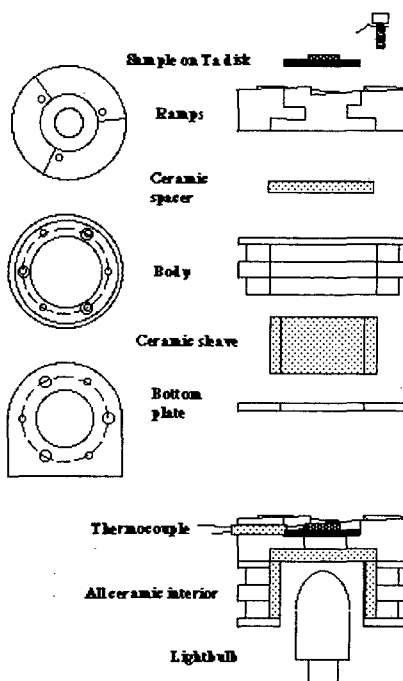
Sample mounting scheme. The sample is held to a 0.010" thick Ta plate by spot welding thin Ta straps over its edges. This assembly is held on the Mo walking ramps by three springs and the ramps are bolted to the body of the sample holder. Note that the inner surface of the sample holder is lined with alumina to minimize the damage sample holder due to the extreme heat of the lightbulb.
